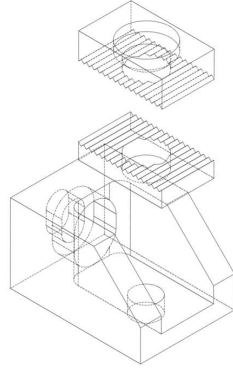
An exploded representation of the three components of the fixed clamp.
